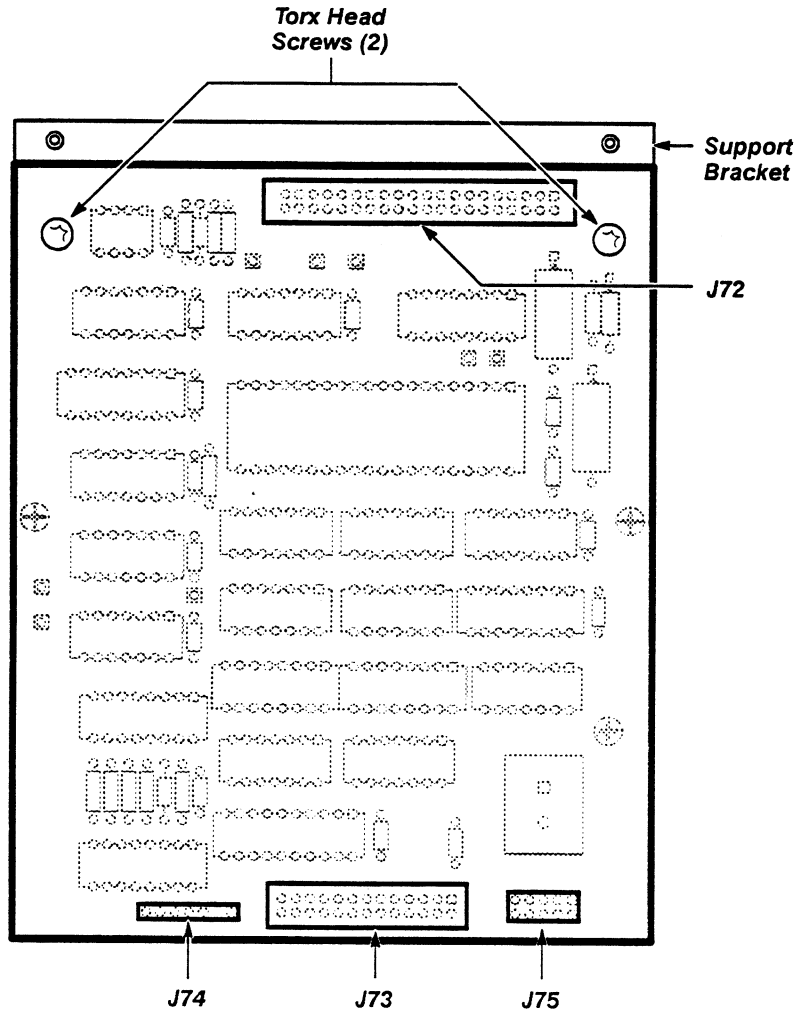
Removing/Replacing the A10 Front Panel Control Board
